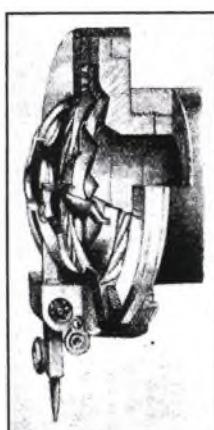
Sectional drawing showing construction of system shown in Fig. 17.
